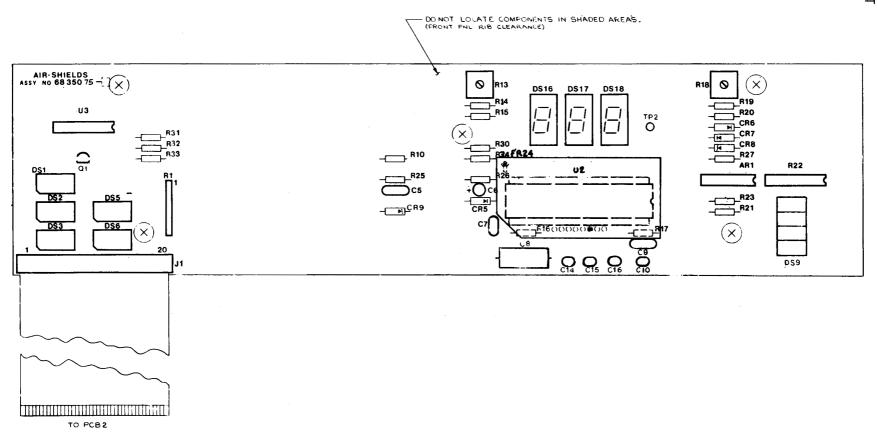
PARTS LOCATION DIAGRAM, DISPLAY BOARD PCB1 - MODEL C82 CONTROLLER
